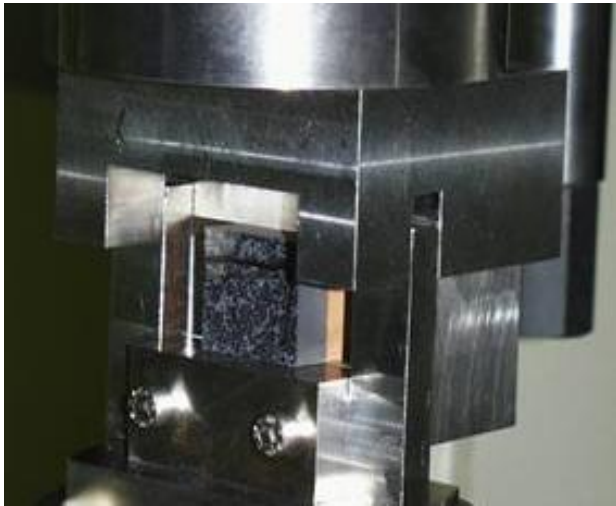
Photograph of a shear test performed on a Be/CuCrZr joint
